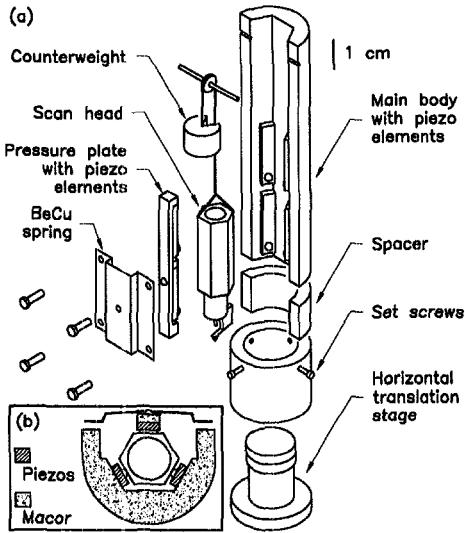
(a) Exploded view of the microscope illustrating the essential components: scan head with counterweight, main body/vertical translation stage, and horizontal translation stage. (b) Cross-sectional view of the microscope showing how the scan head is held in position.
